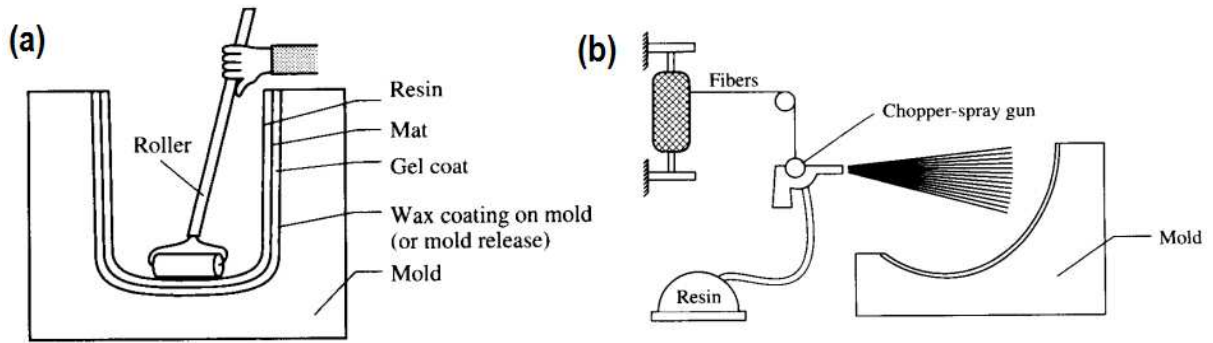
Open mold composite fabrication: (a) hand lay-up and (b) spray-up [4]
